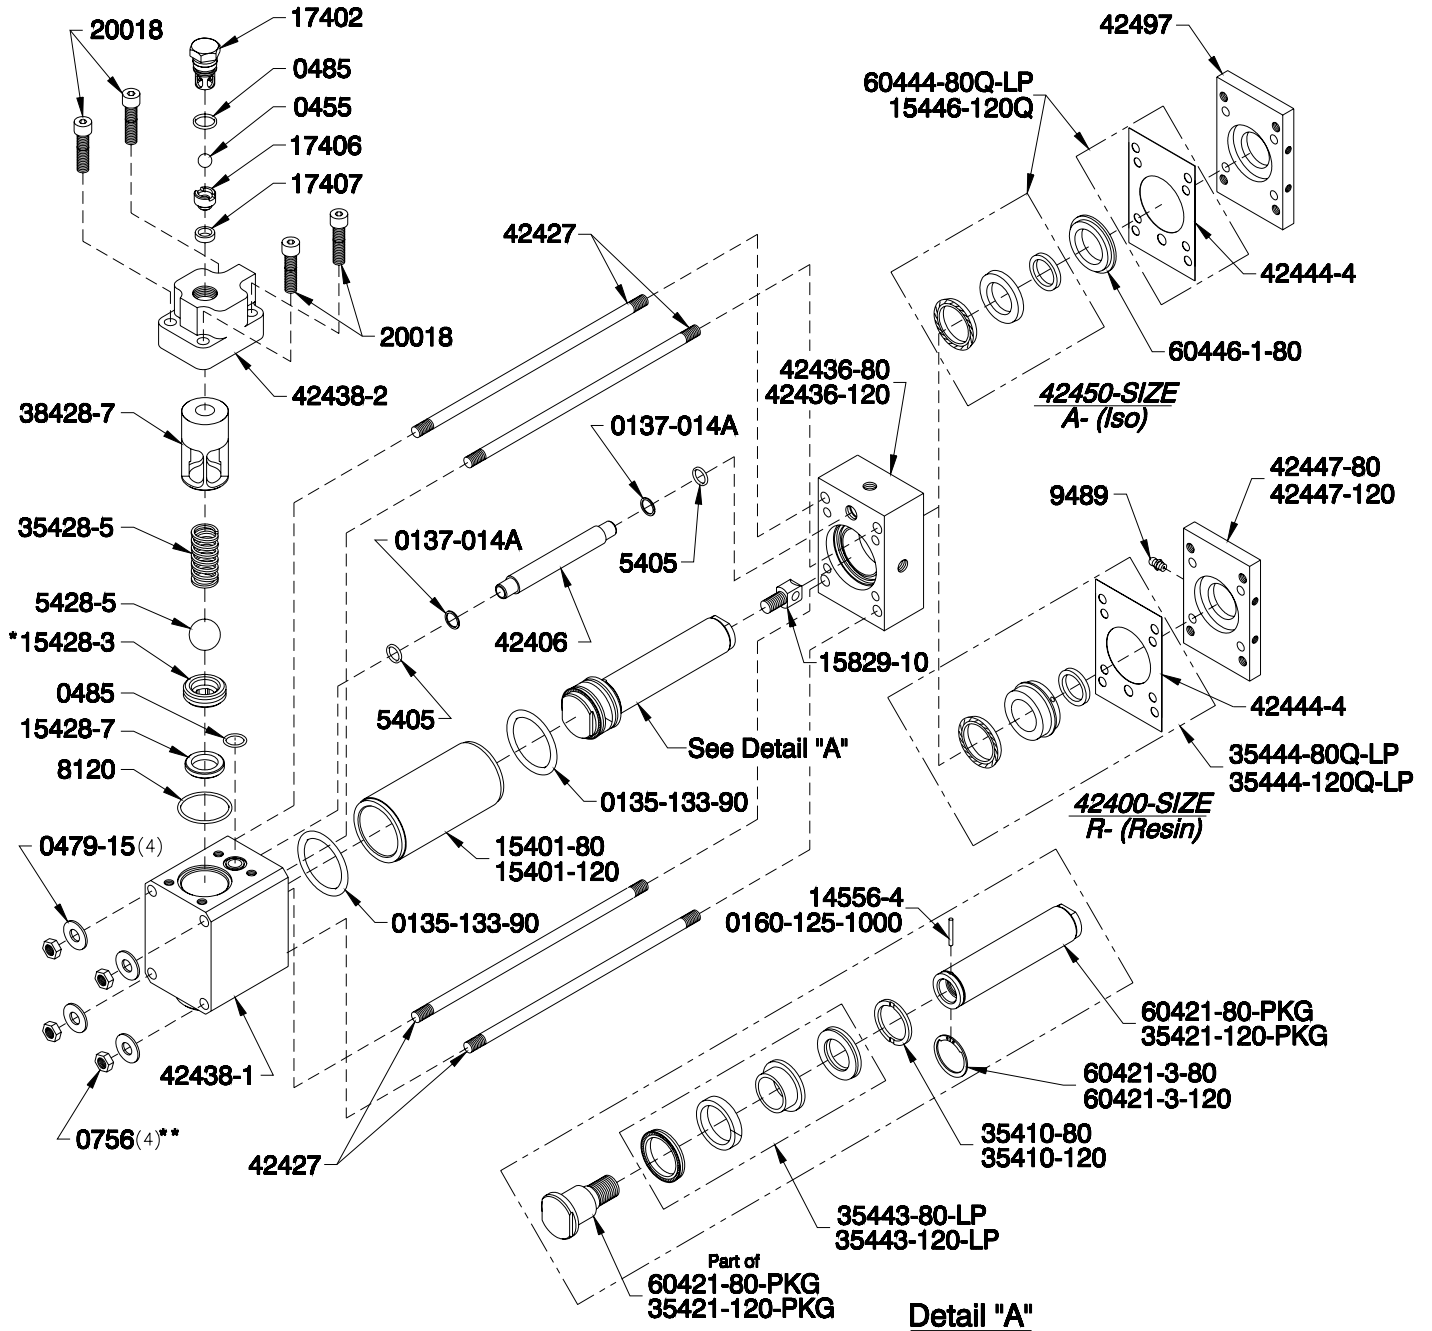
Proportioning Pump Assembly (Part No. 42400/42450-80 and 120), Exploded View
